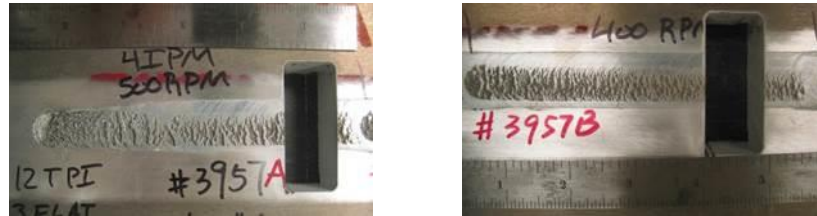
Weld Crowns with bad surface defects of SSSPH under (a) 400 rpm & 102 mm/min and (b) 500 rpm & 102 mm/min
